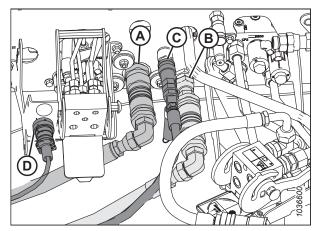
Header Drive Hydraulics – M2170 Connection Locations
